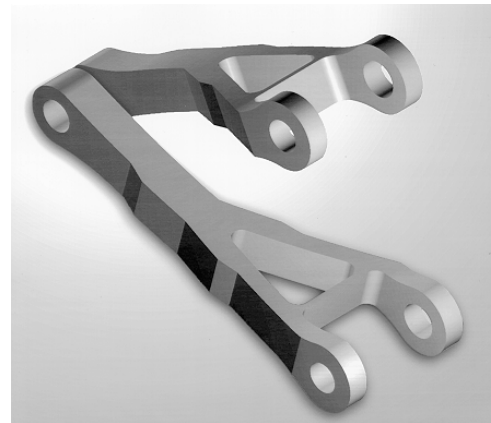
Torque link design (bold Upper and Lower Torque links)
